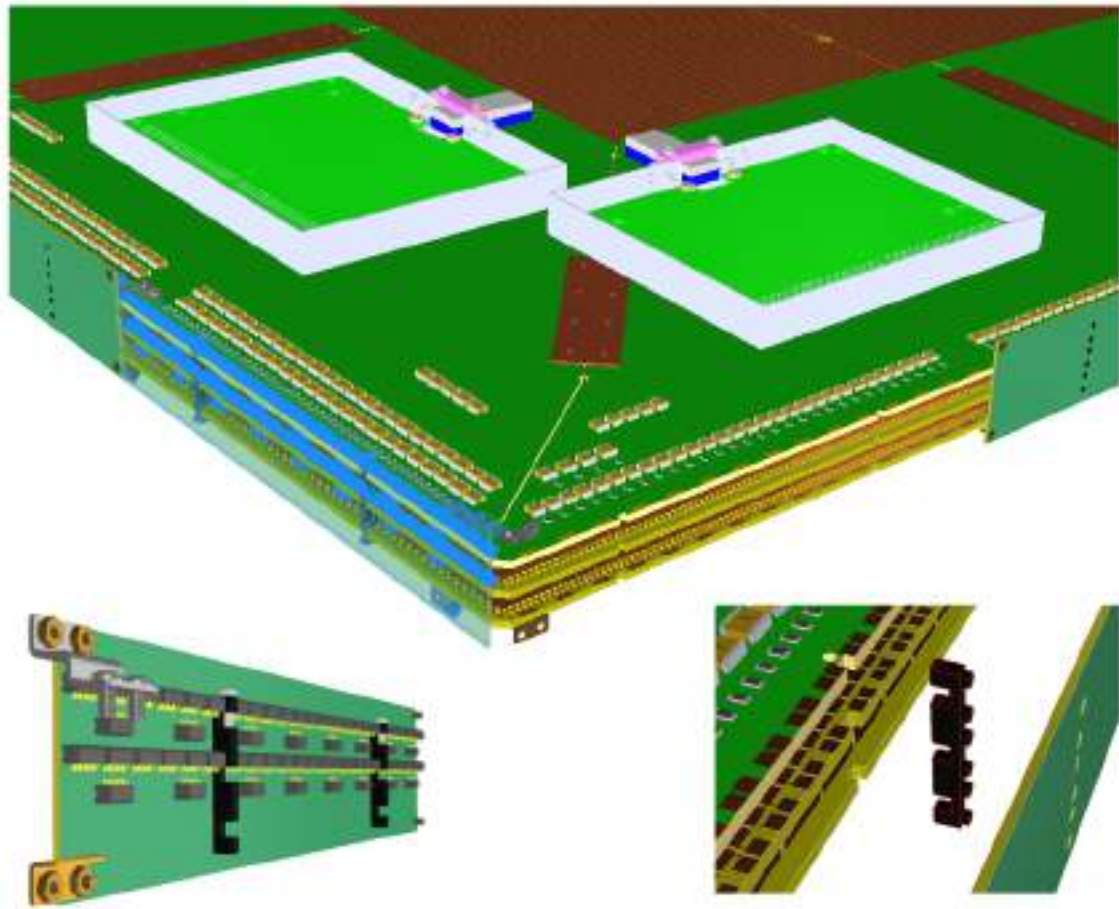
Top: details of anode assembly and edge card installation. Two layers of PCB panel are visible with an adapter board on top of them. Edge cards are plugged into the side (blue/transparent edge card on the left shows the details of the connectors, also a green one on the right). FEMBs (bright green rectangles) and capacitors on the adapter boards are also visible. Bottom left: an edge card showing connectors with yellow pins. 3D printed guides (black) and brackets are also shown. Bottom right: 3D printed guide, its location for gluing onto the edge card, and dedicated notches on the adapter board and PCBs are shown.
